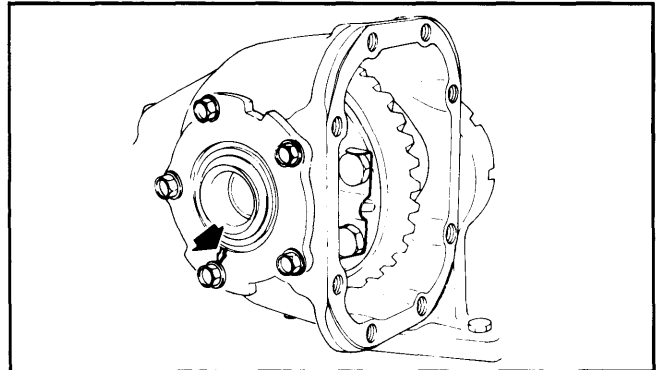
Side Bearing Preload Identification Marks (R180 Differential Shown)
